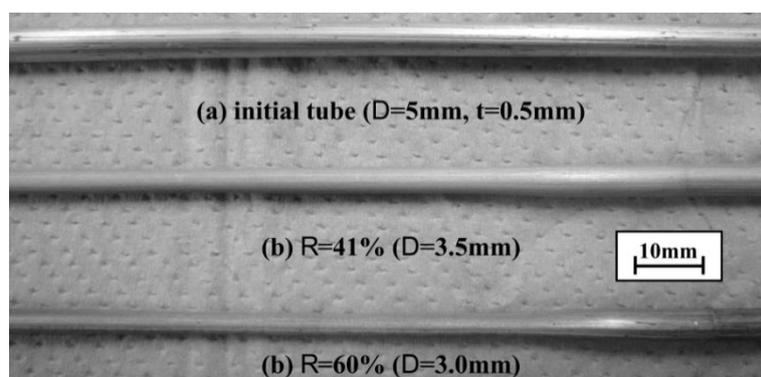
Photograph of deformed tubes after dieless drawing process in a single-pass under a condition of heating temperature of 450°C.
